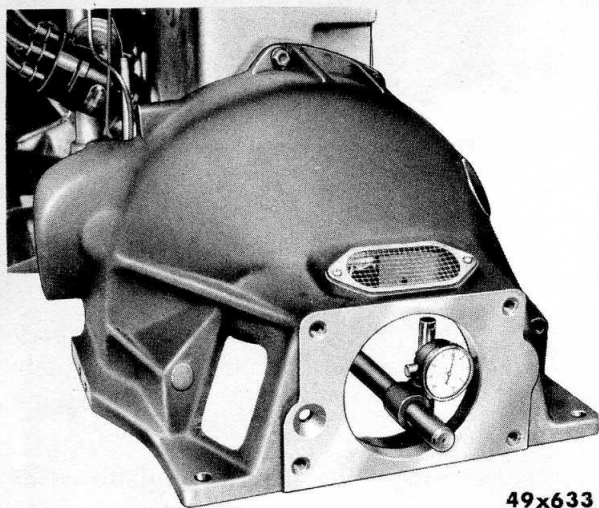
Checking Clutch Housing Bore (Fluid Coupling
